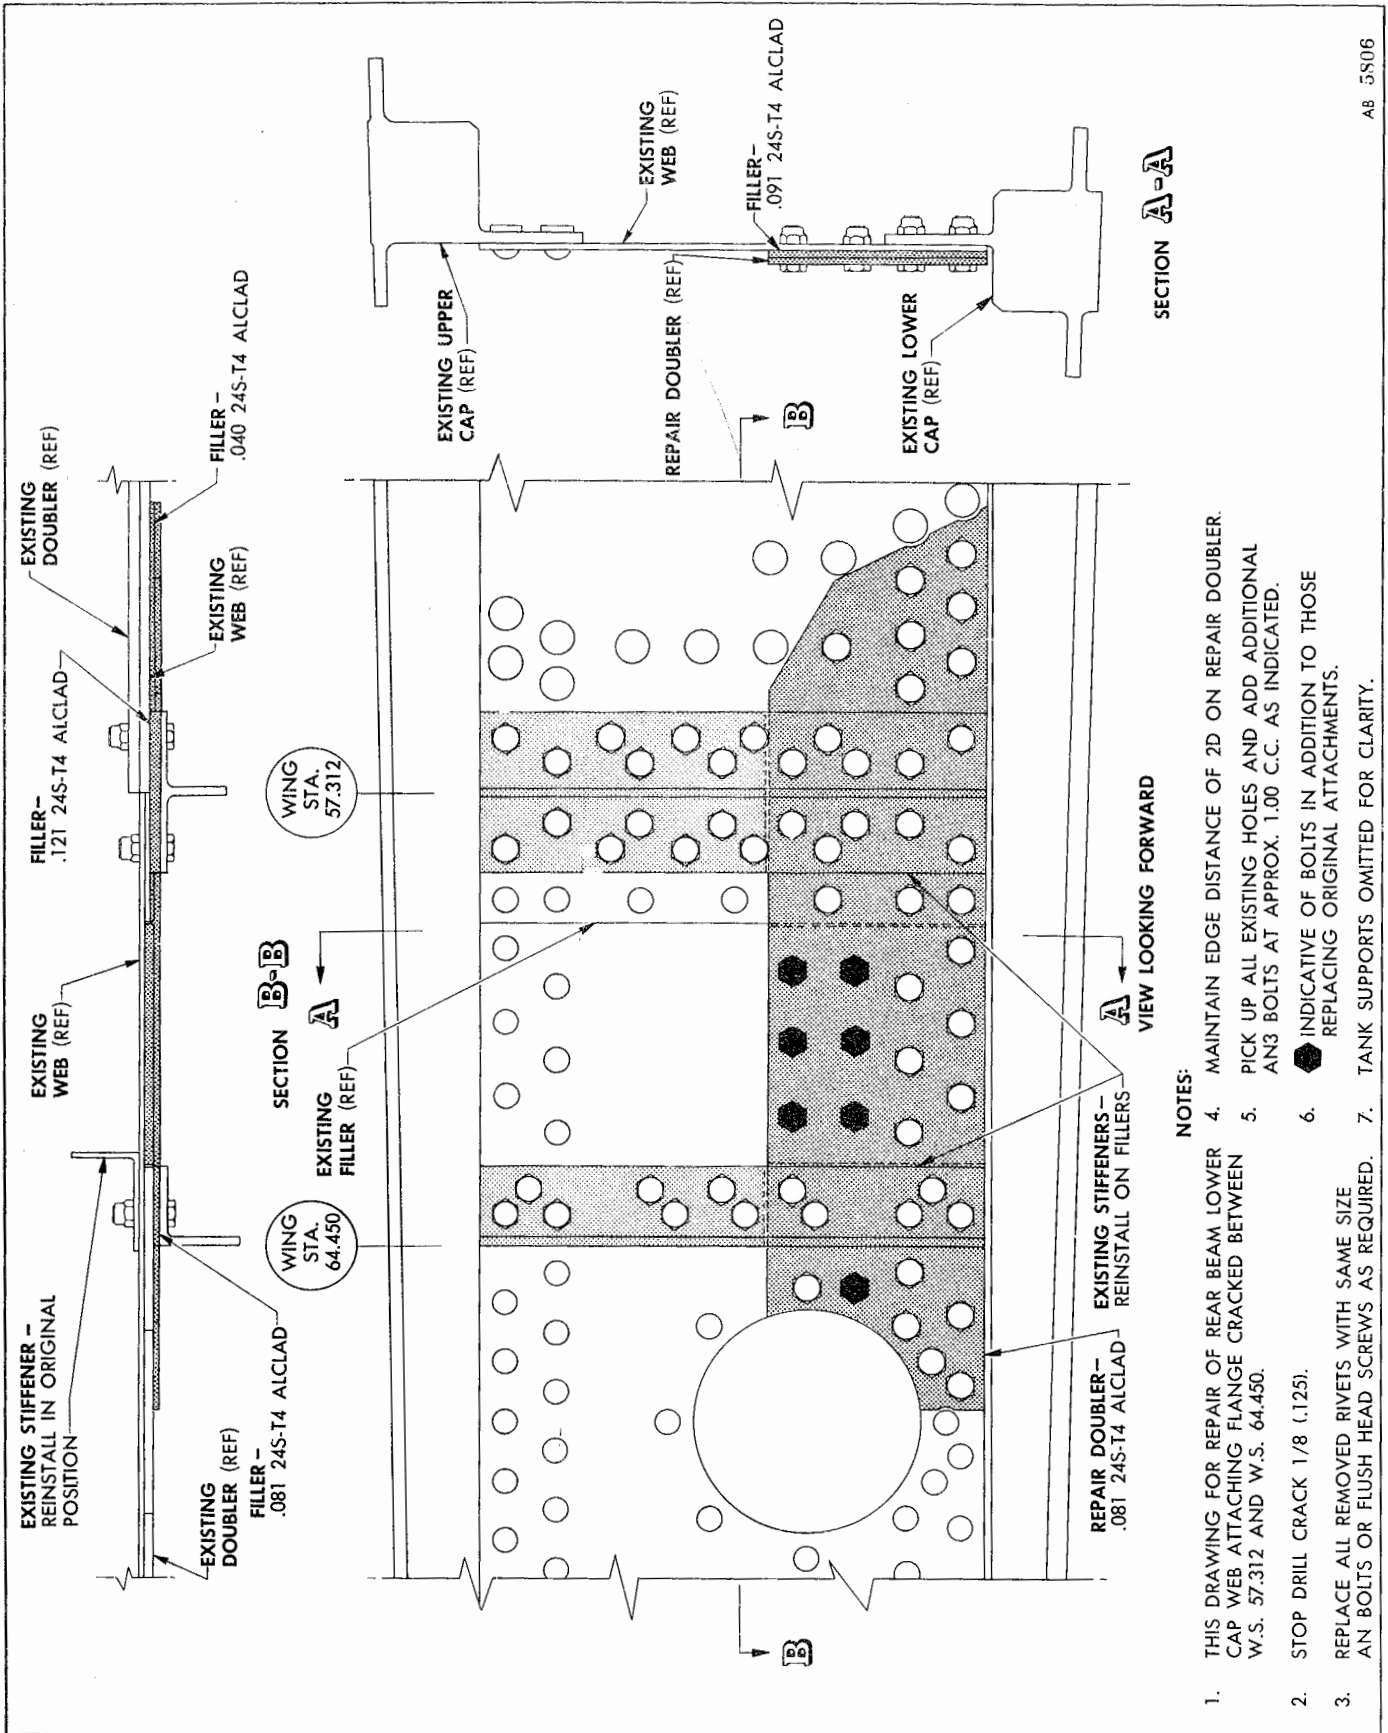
C - Wing Rear Beam Lower Cap Forward Skin Attachment Flange Repair
